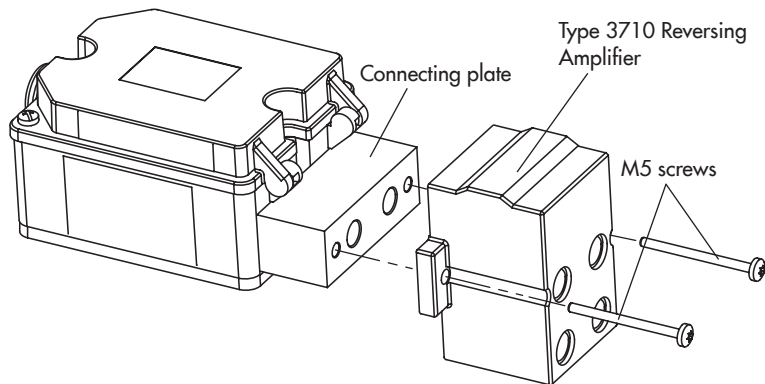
Mounting the Type 3710 Reversing Amplifier
